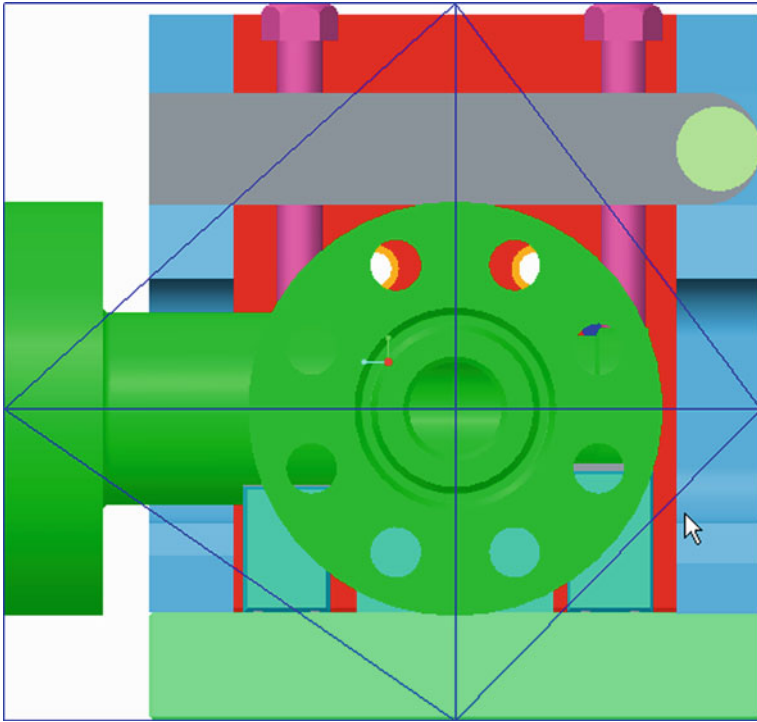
3D view of set up-1 fixture in 8 diamond quadrants
